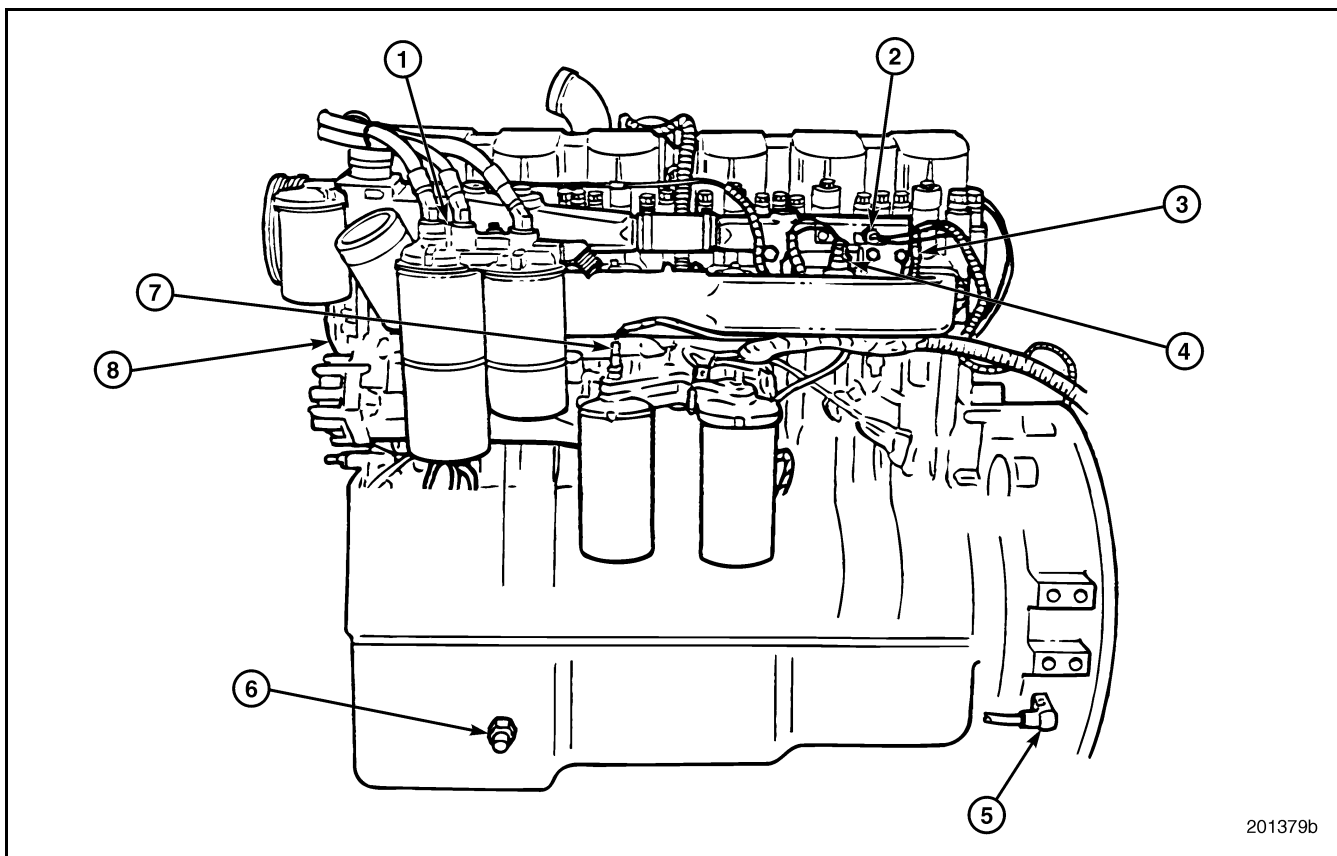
V-MAC III Engine-Mounted Sensor Locations (Pre-Left-Side Redesign)
